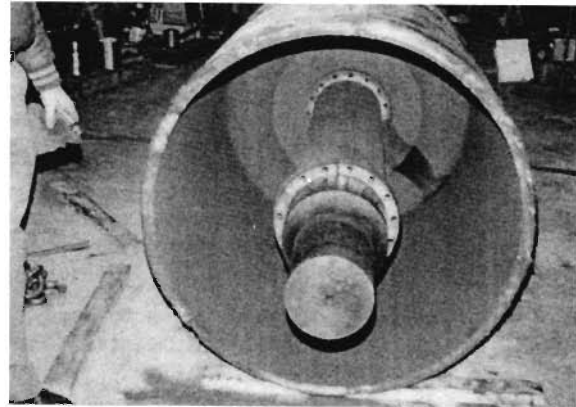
SHELL FATIGUE FAILURE AT DISK/SHELL CIRCUMFERENTIAL WELD
